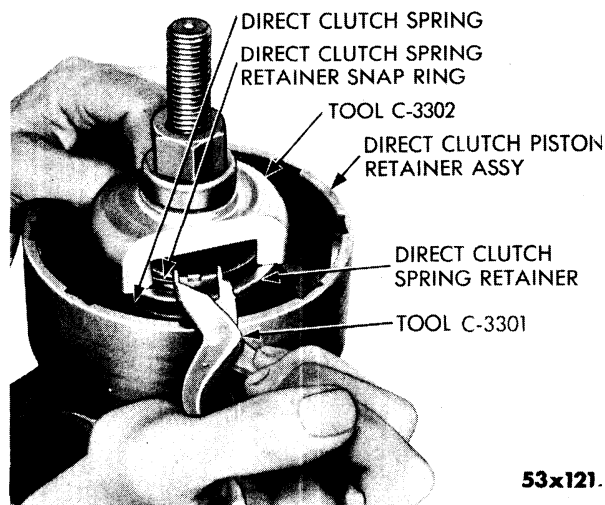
Removal and Installation of Direct Clutch Spring Retainer Snap Ring (Typical View)
